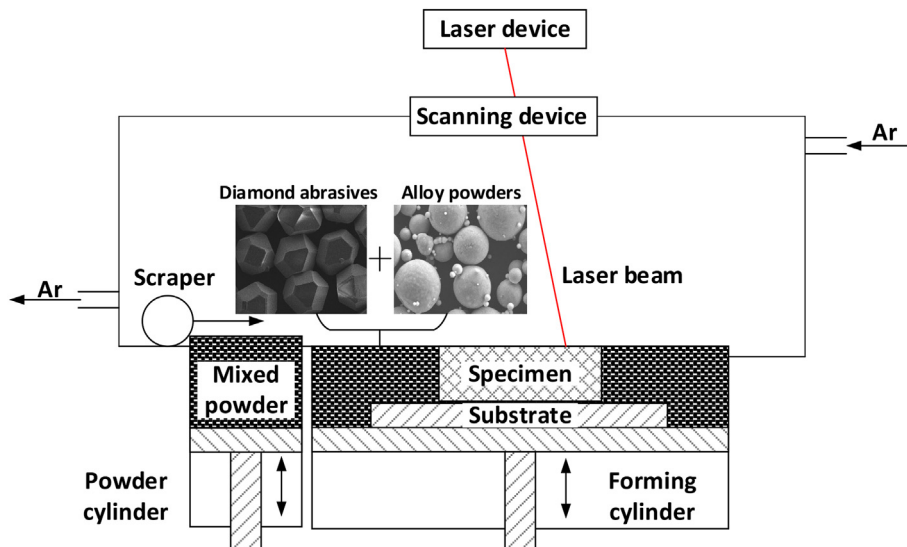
Fabrication principle of 3D-printed metal-bonded diamond grinding wheel.
